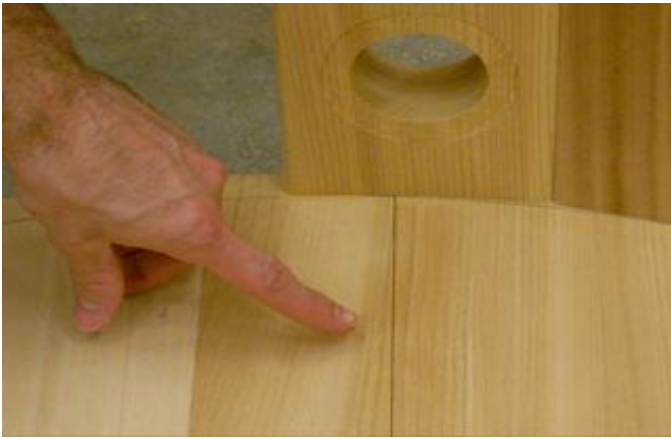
First stave straddles floor seam (4' ellipse tub has one piece floor and no floor seam, all others do).
